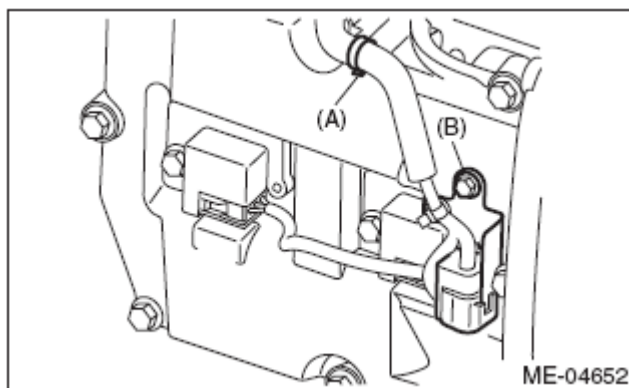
Identifying Rocker Cover Stay And Engine Harness Clip
